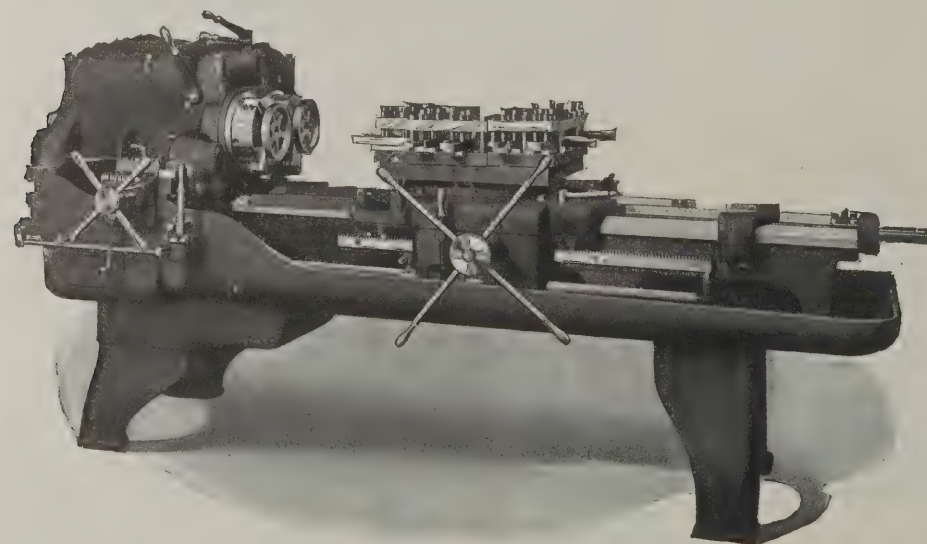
Jones & Lamson Double-spindle Flat Turret Lathe
